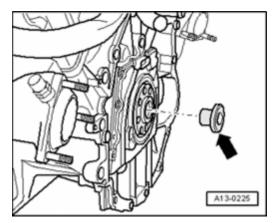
Torque Converter Centering Bushing Courtesy of VOLKSWAGEN UNITED STATES, INC.
